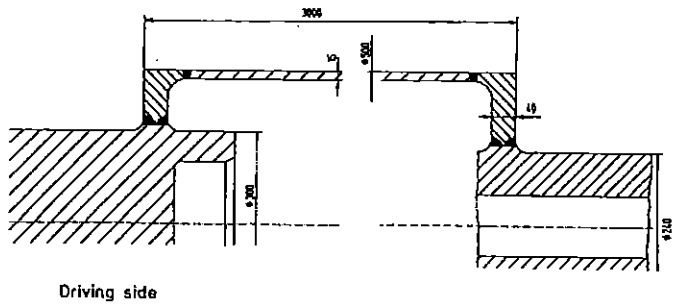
Fatigue critical areas of a welded stirrer
